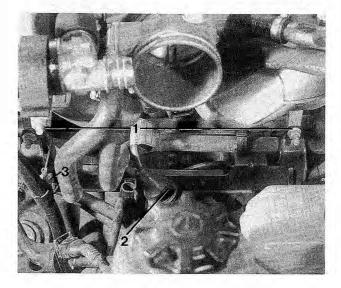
Mounting nuts for wire harness retaining bracket (1), fuel injector harness connector (2), and oil dipstick mounting bracket (3).
